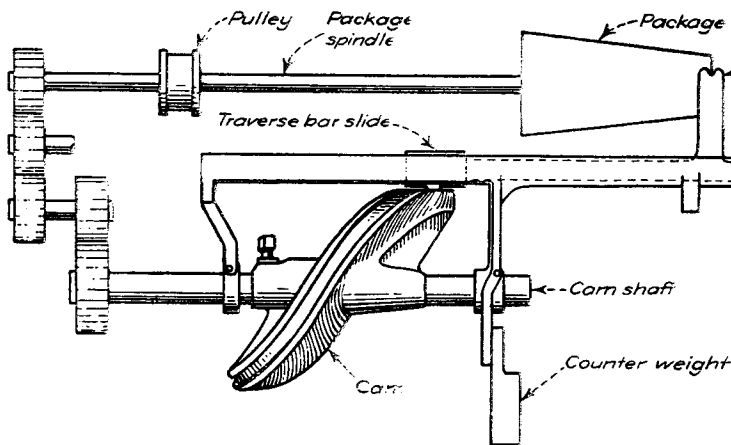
Package is mounted on belt driven shaft on this precision type winding mechanism. Cam shaft imparts reciprocating motion to traverse bar by means of cam roll that runs in cam groove. Gears determine speed ratio between cam and package. Thread guide is attached to traverse bar. Counterweight keeps thread guide against package.
